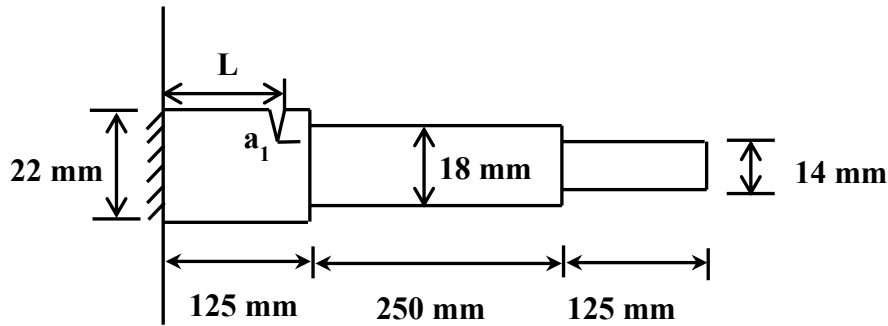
Sketch of single cracked two stepped cantilever beam of rectangular cross-section
